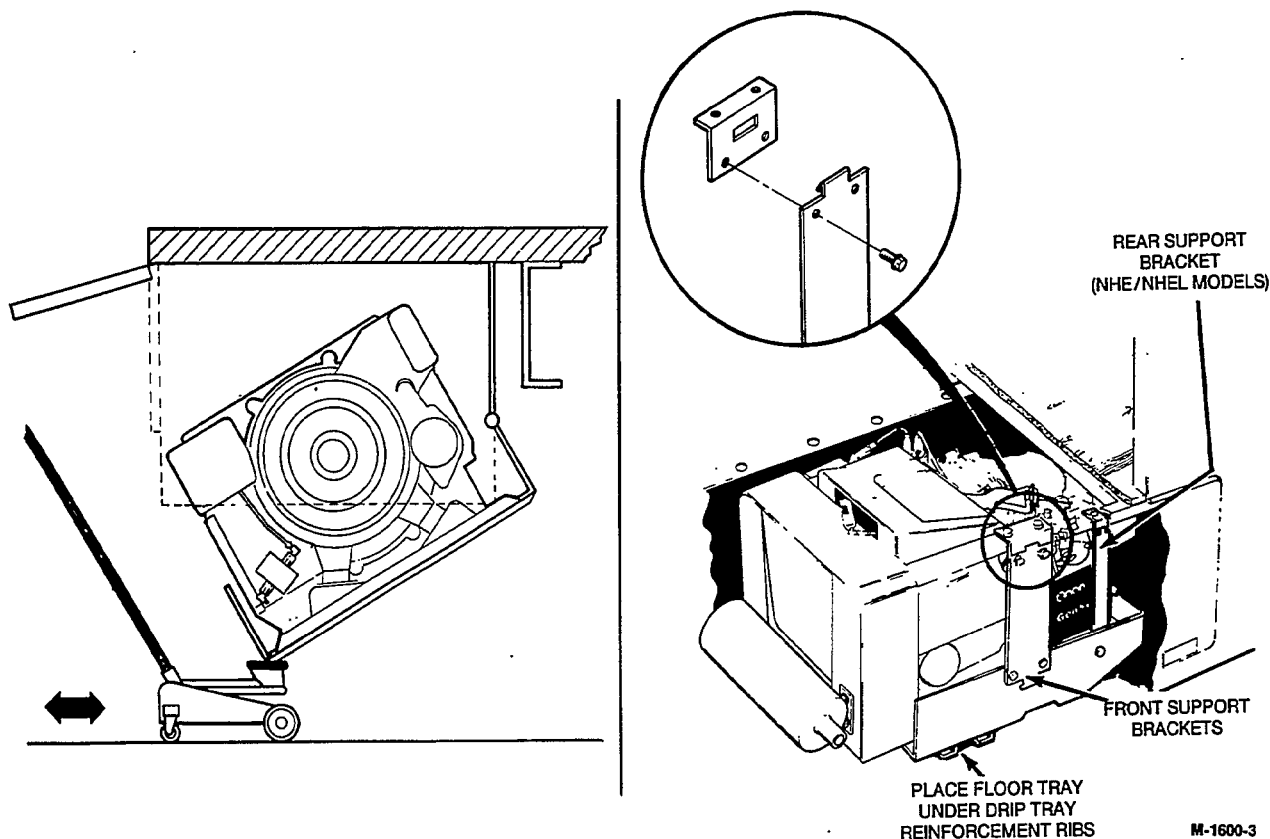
LOWERING UNDER-FLOOR MOUNT GENERATOR SET
